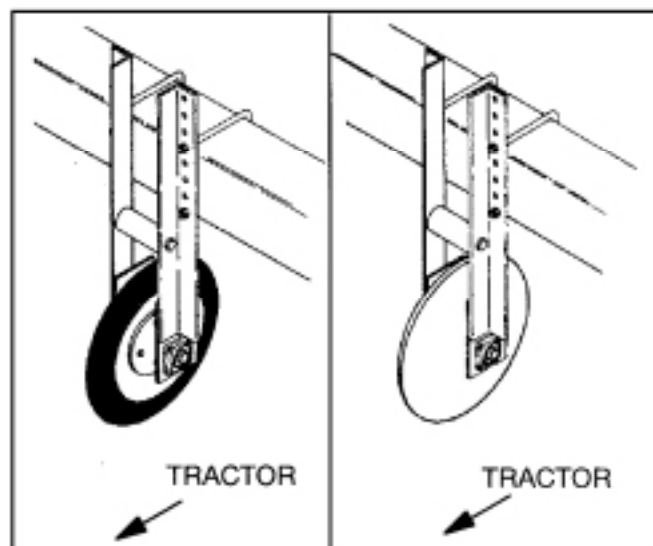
Semi-Pneumatic Wheels (left) & Steel Guide Wheels (right)
